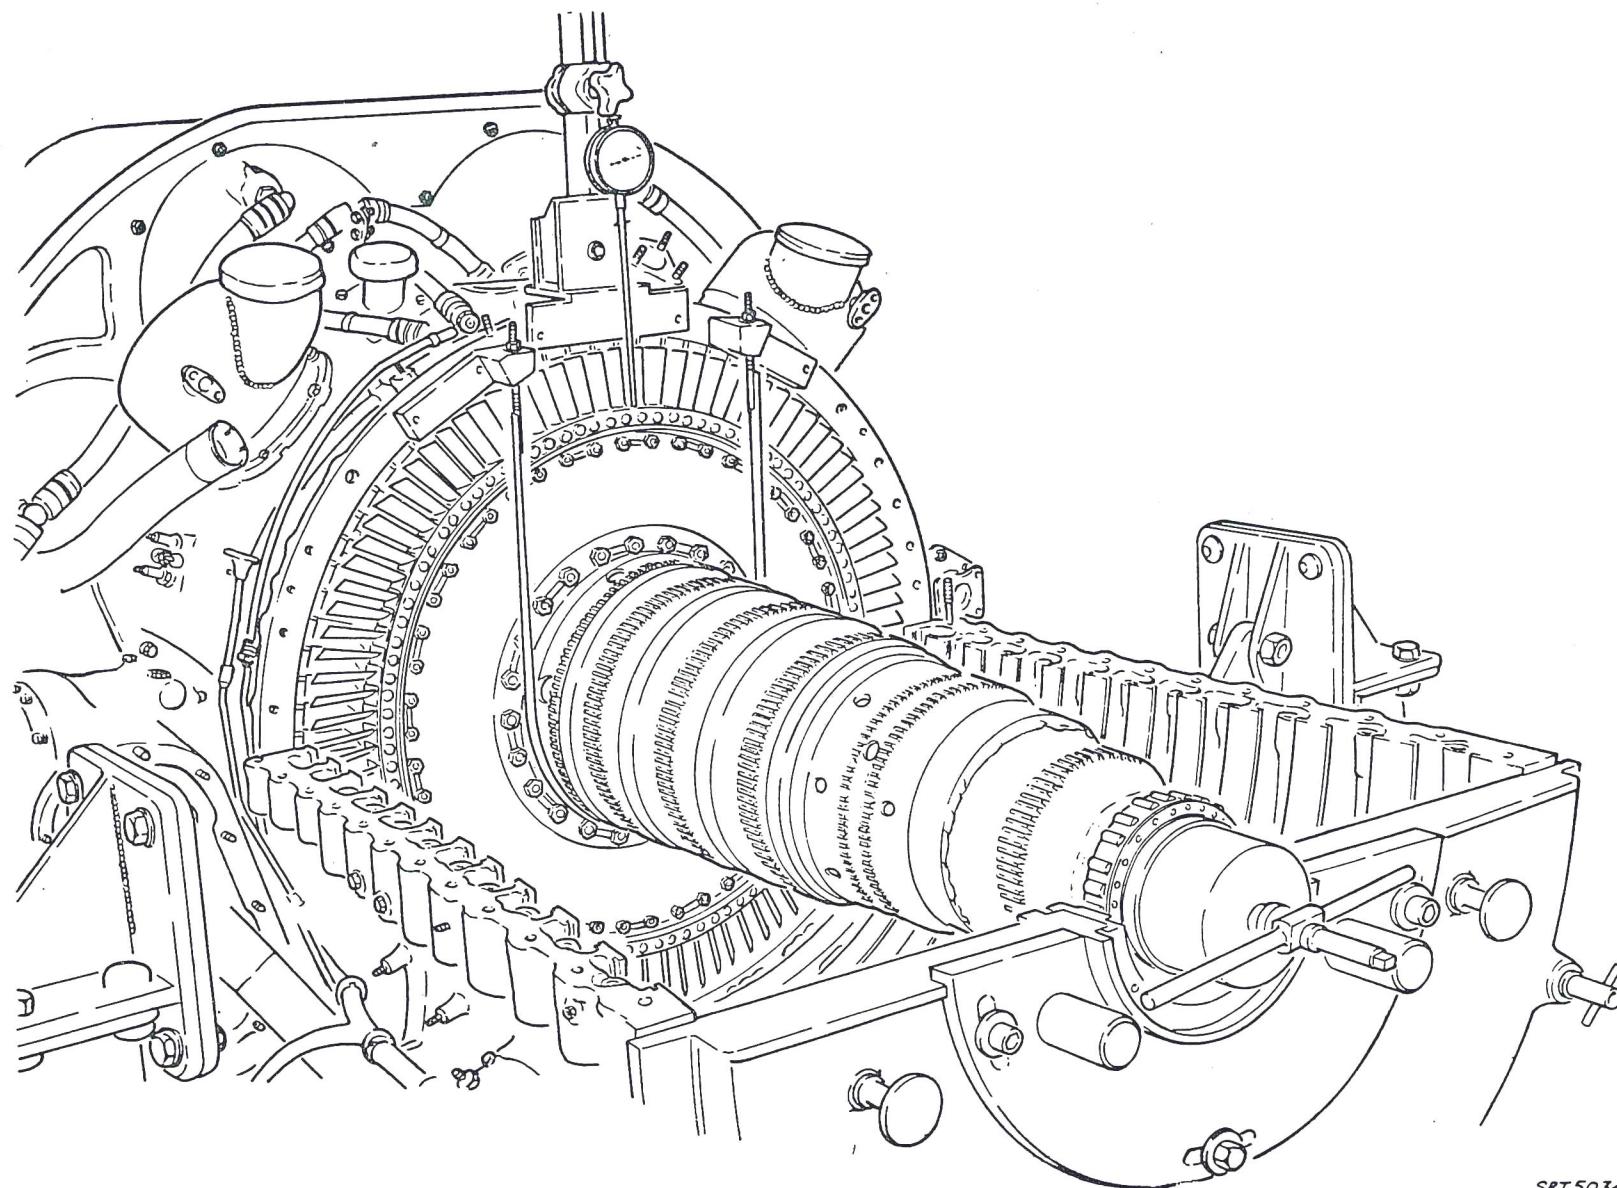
Compressor assembly rotor pack supported by stage 12 support brackets and strap
